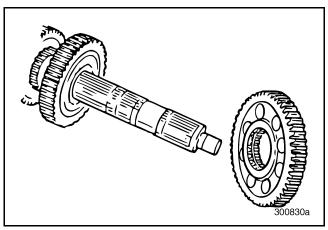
Removing Lo-Speed Gear (T313L/T318L Shown)
